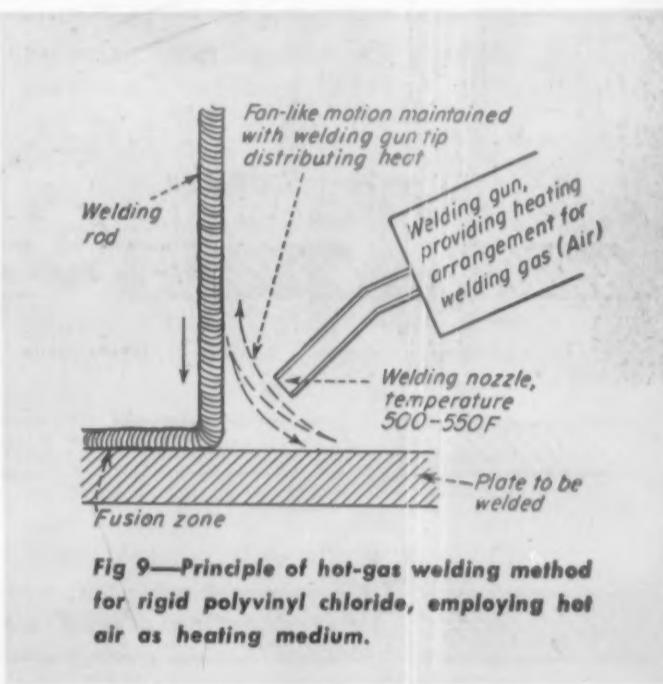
Principle of hot-gas welding method for rigid polyvinyl chloride, employing hot air as heating medium.
